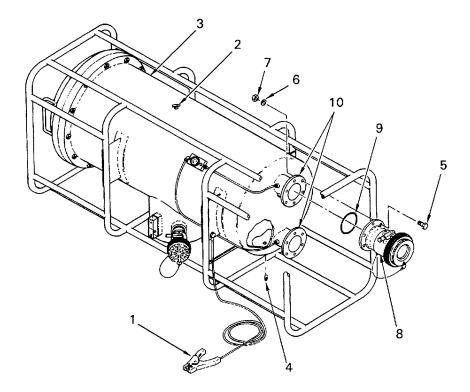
Flange Mount Three-Inch Unisex Coupling
